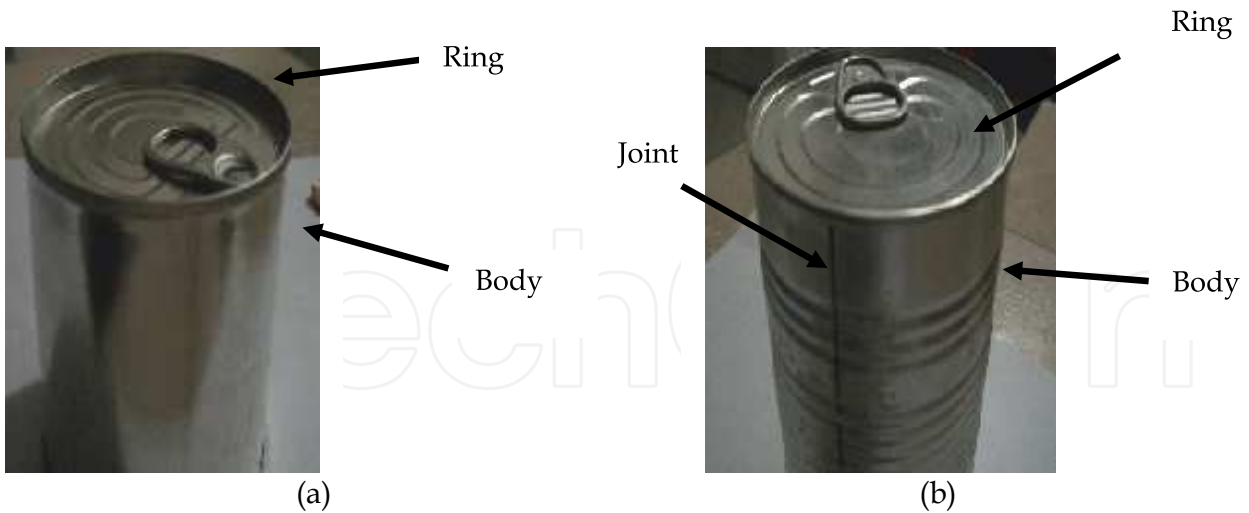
(a) Aluminum cans without seams, in two parts: ring and body (b) Steel cans with seams: body, joint and rings
